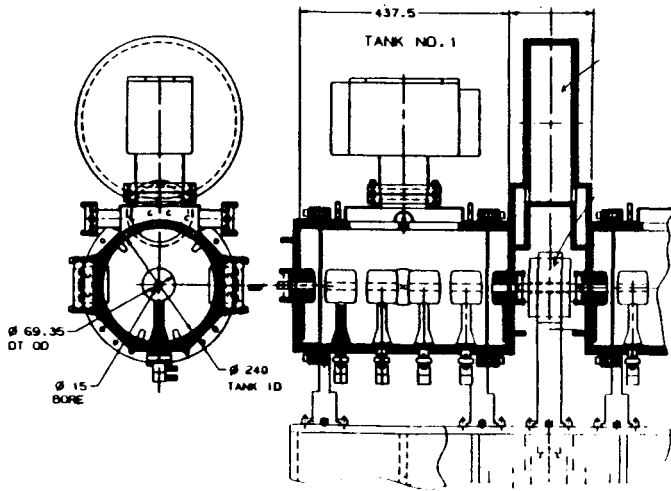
BCDTL tank cutaway view showing the drift-tube geometry.
